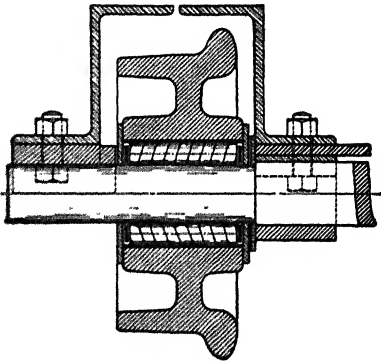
Spiral roller bearing with square axle turned down at the ends.
